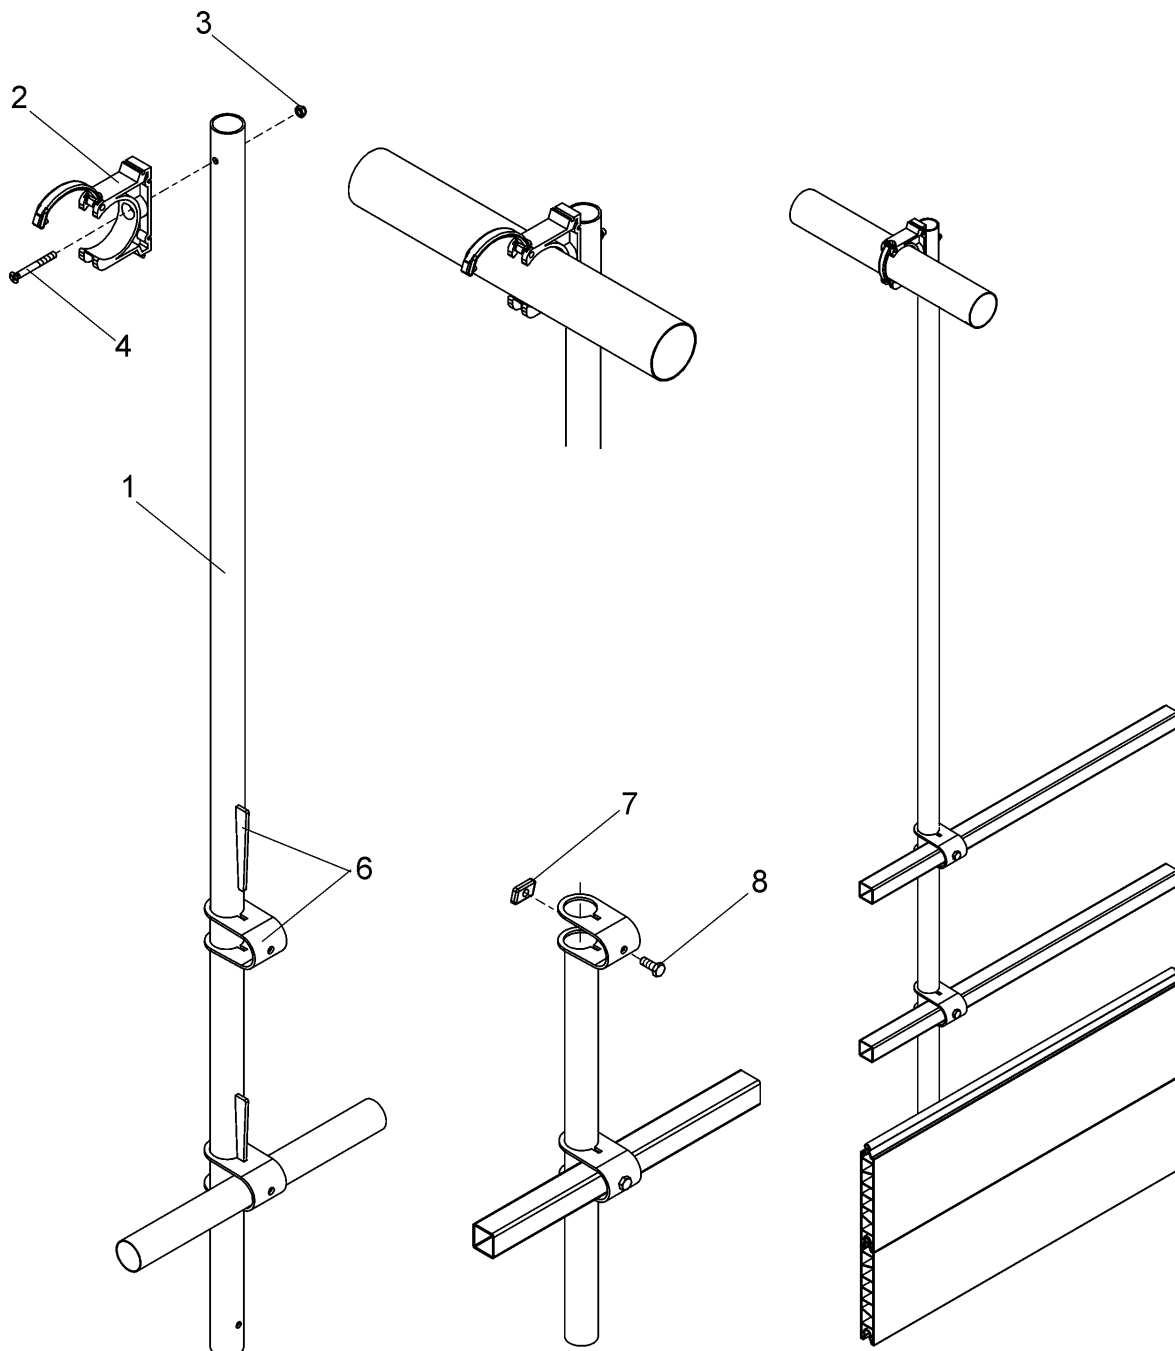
Code no. 20-50-3680 & 20-50-3706
